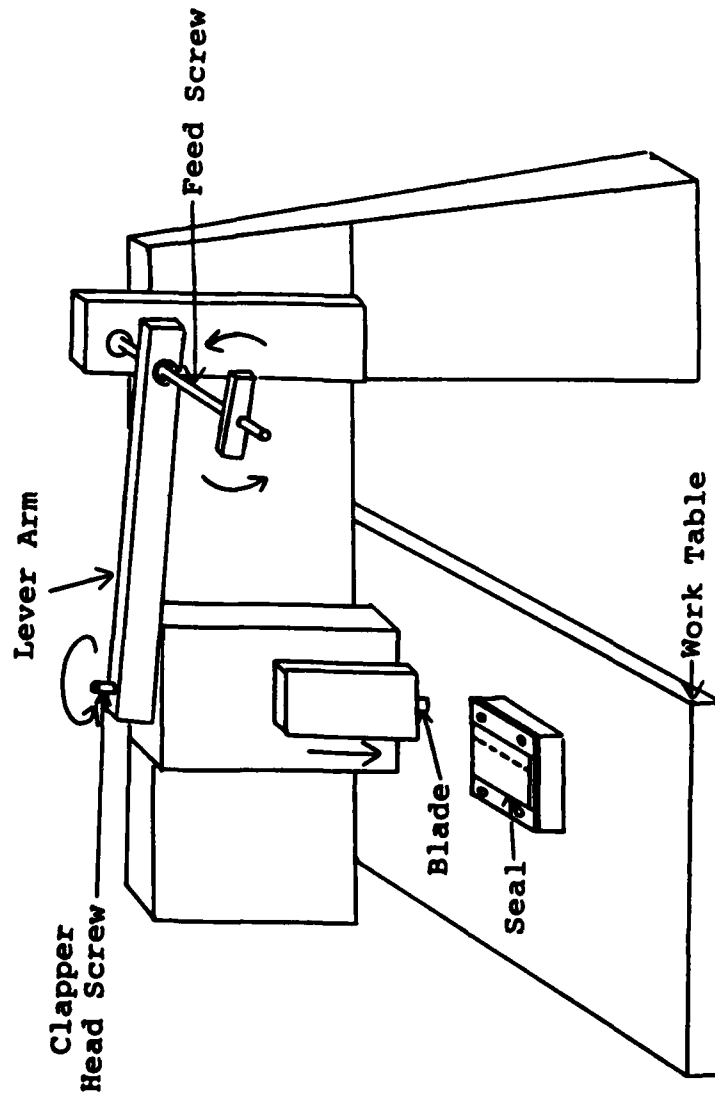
Feed mechanism. When the feed screw is rotated, the lever arm turns the clapper head screw, which lowers the blade.
